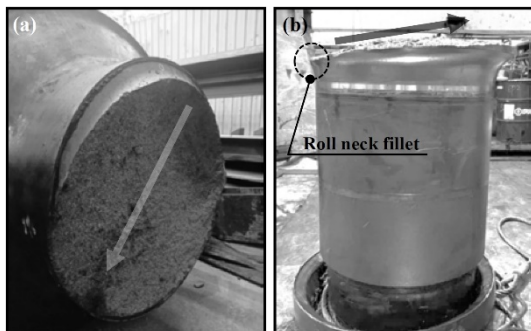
Fracture appearance of (a) Part A and (b) Part B.
